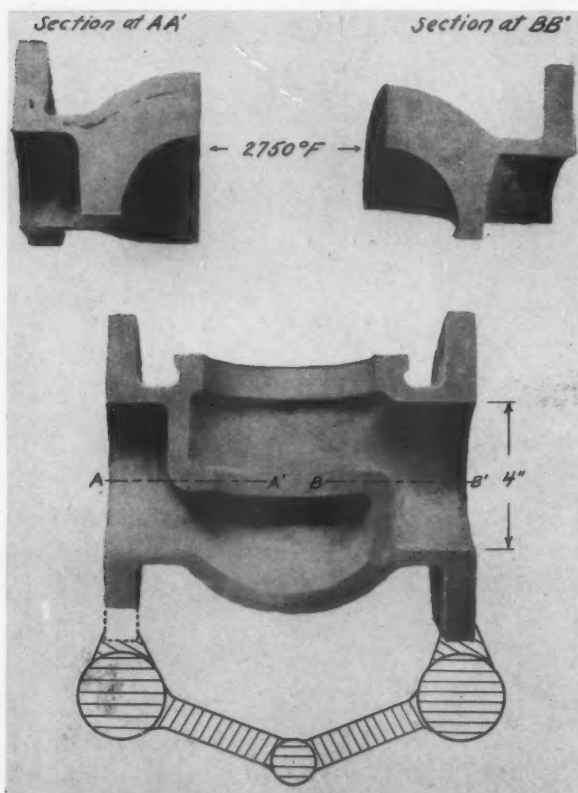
FOUR IN. CHECK VALVE, CAST AT 2750° F.—POURED TOO HOT AND INCOMPLETELY FED.
